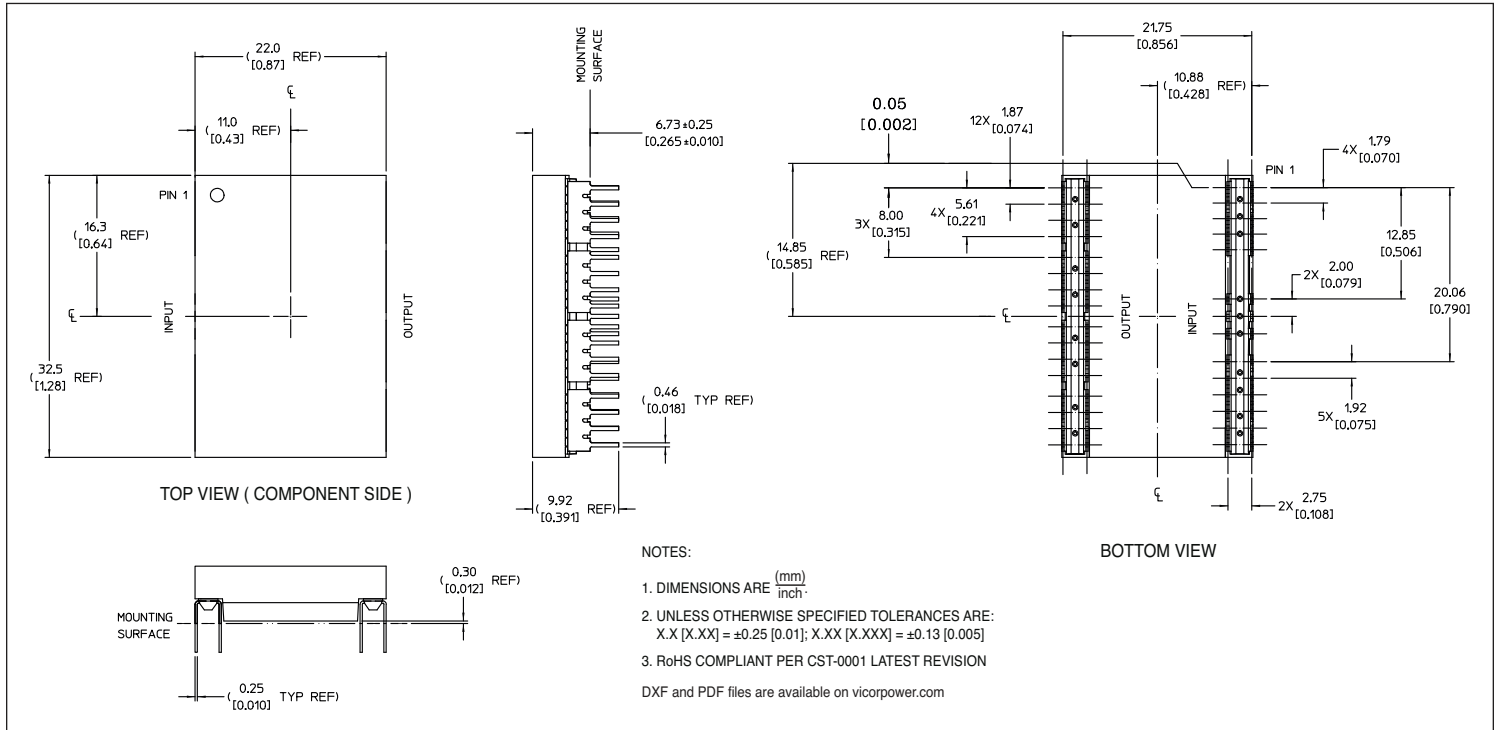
BCM<sup>®</sup> through-hole module mechanical outline
